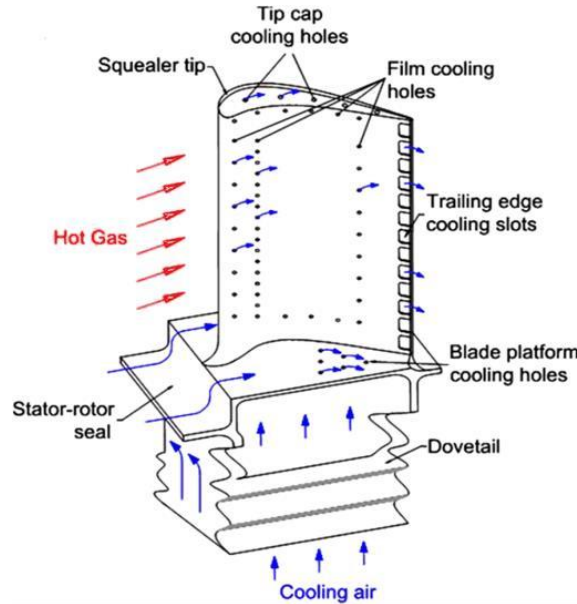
Film cooled gas turbine blade. Reprinted from [4].
